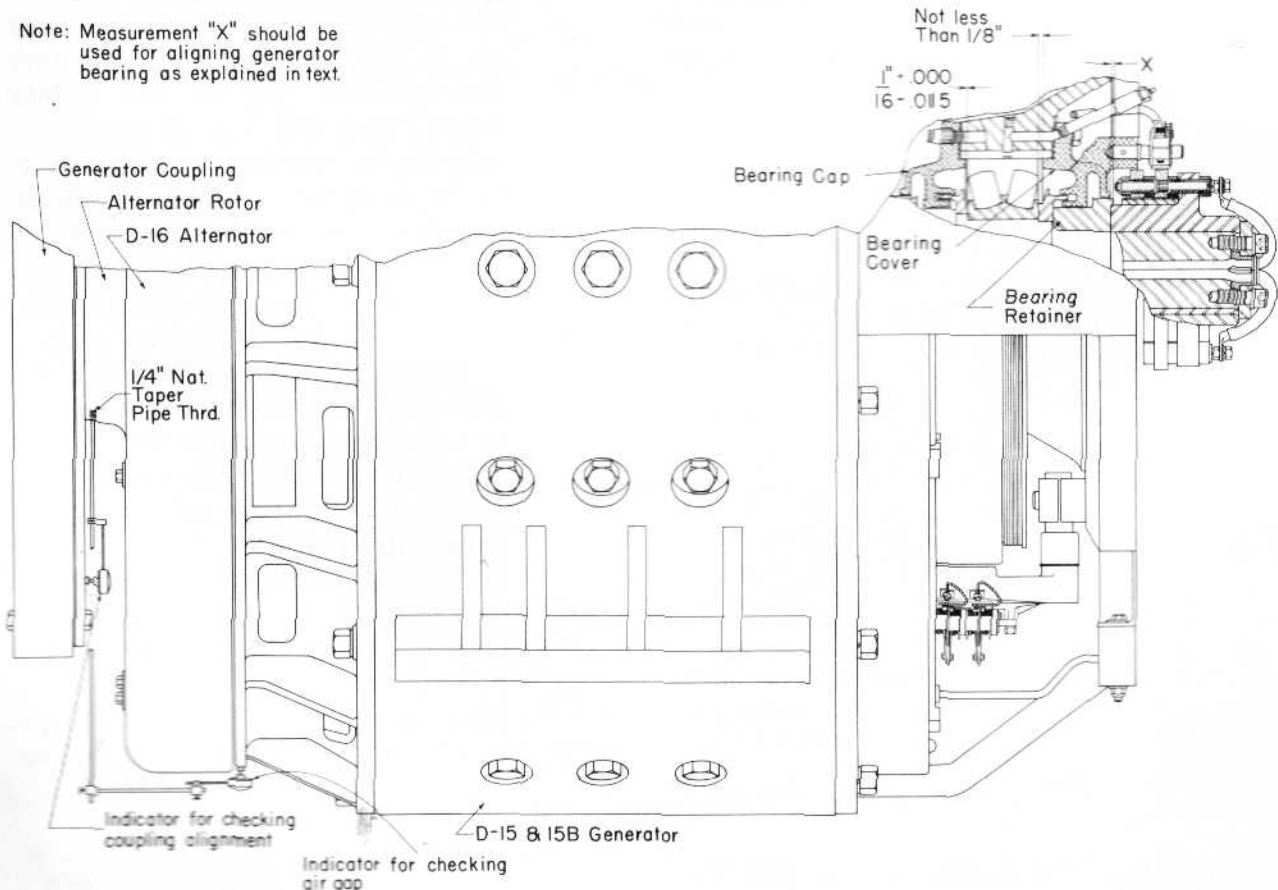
Generator Alignment Information D15 And D15B Generators
